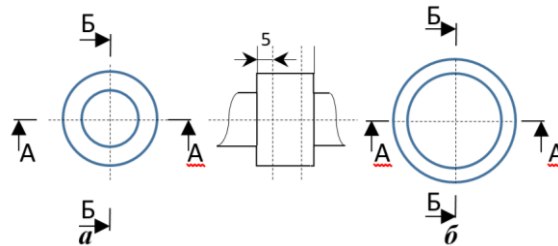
The scheme of measurement of wear of the worked details: a - a shaft; b - bushing.
